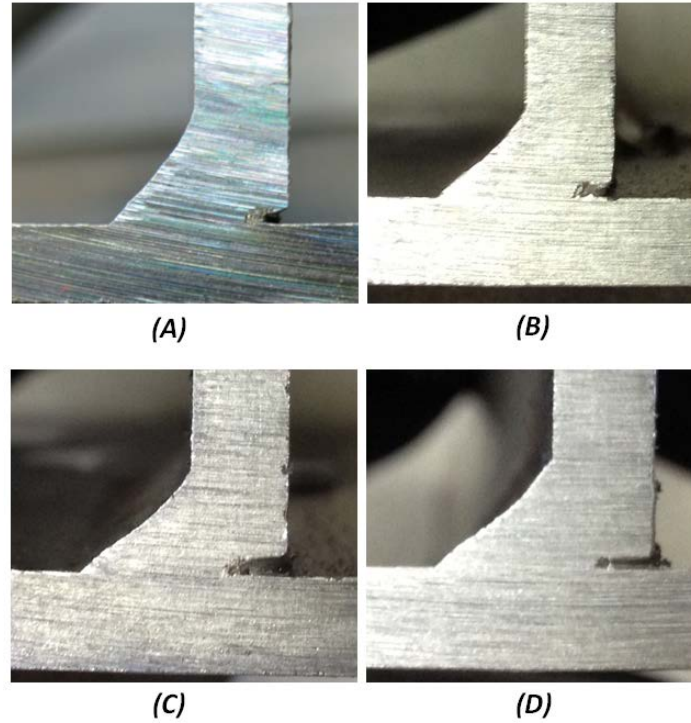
Cross-sections of Fillet Welding Experiments
